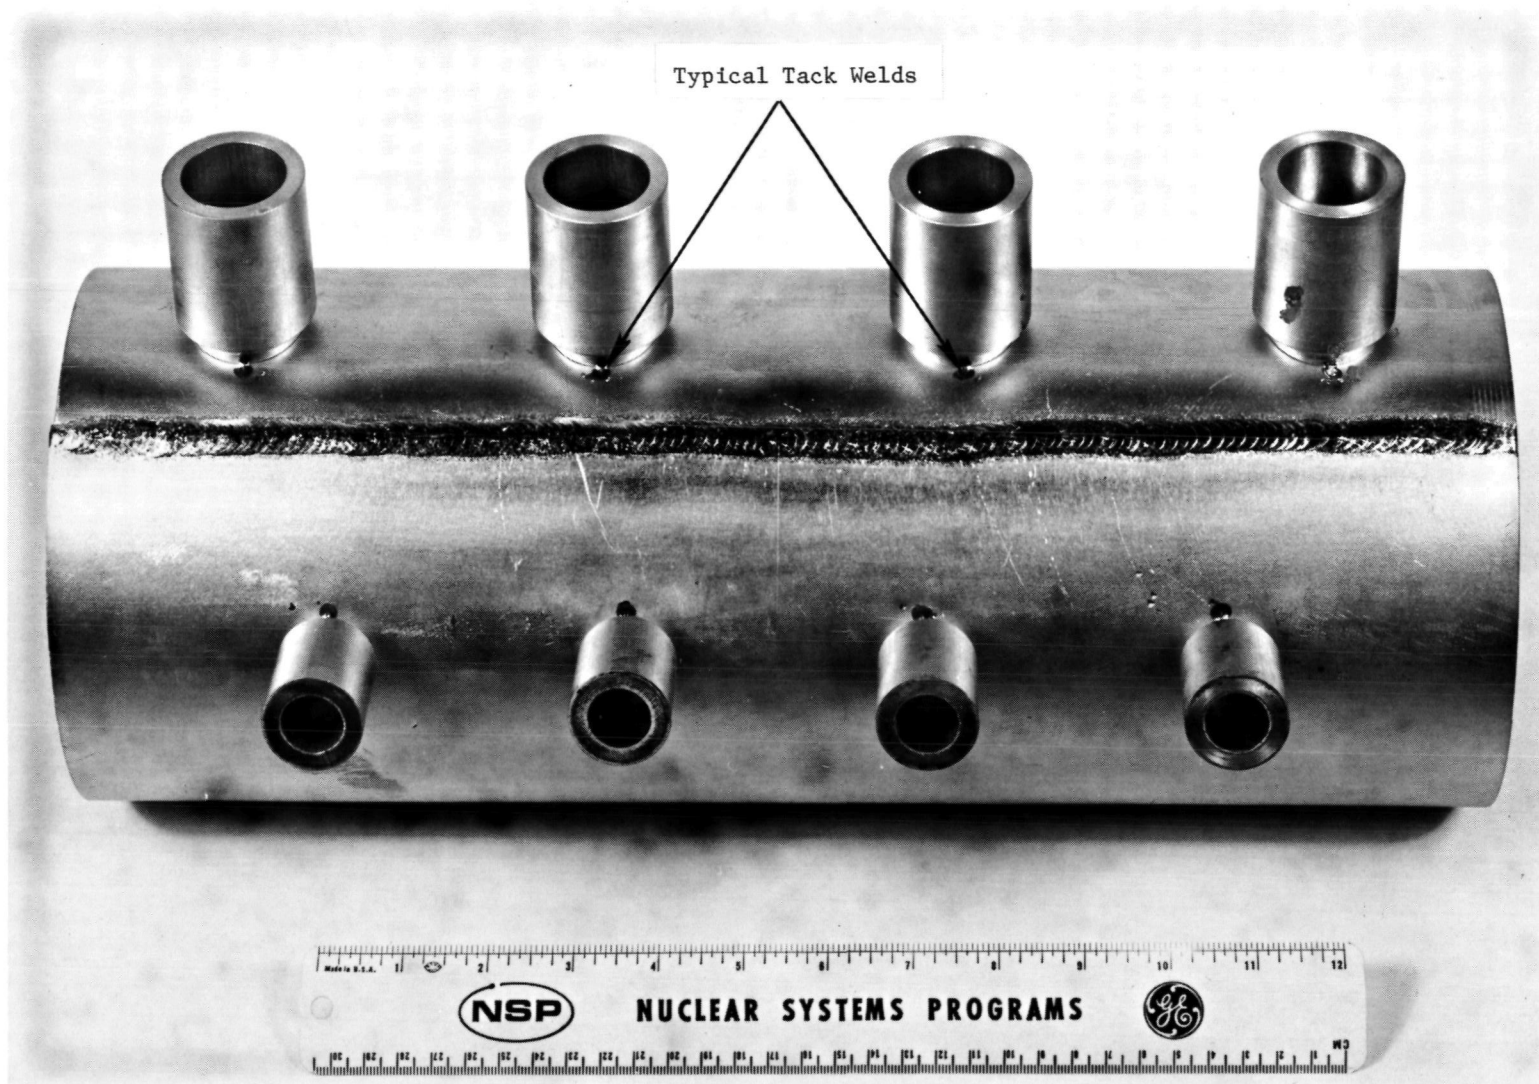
Weld Qualification Test Specimen Illustrating GTA Tack Welds Used for Boss Positioning. (P69-2-42A)
